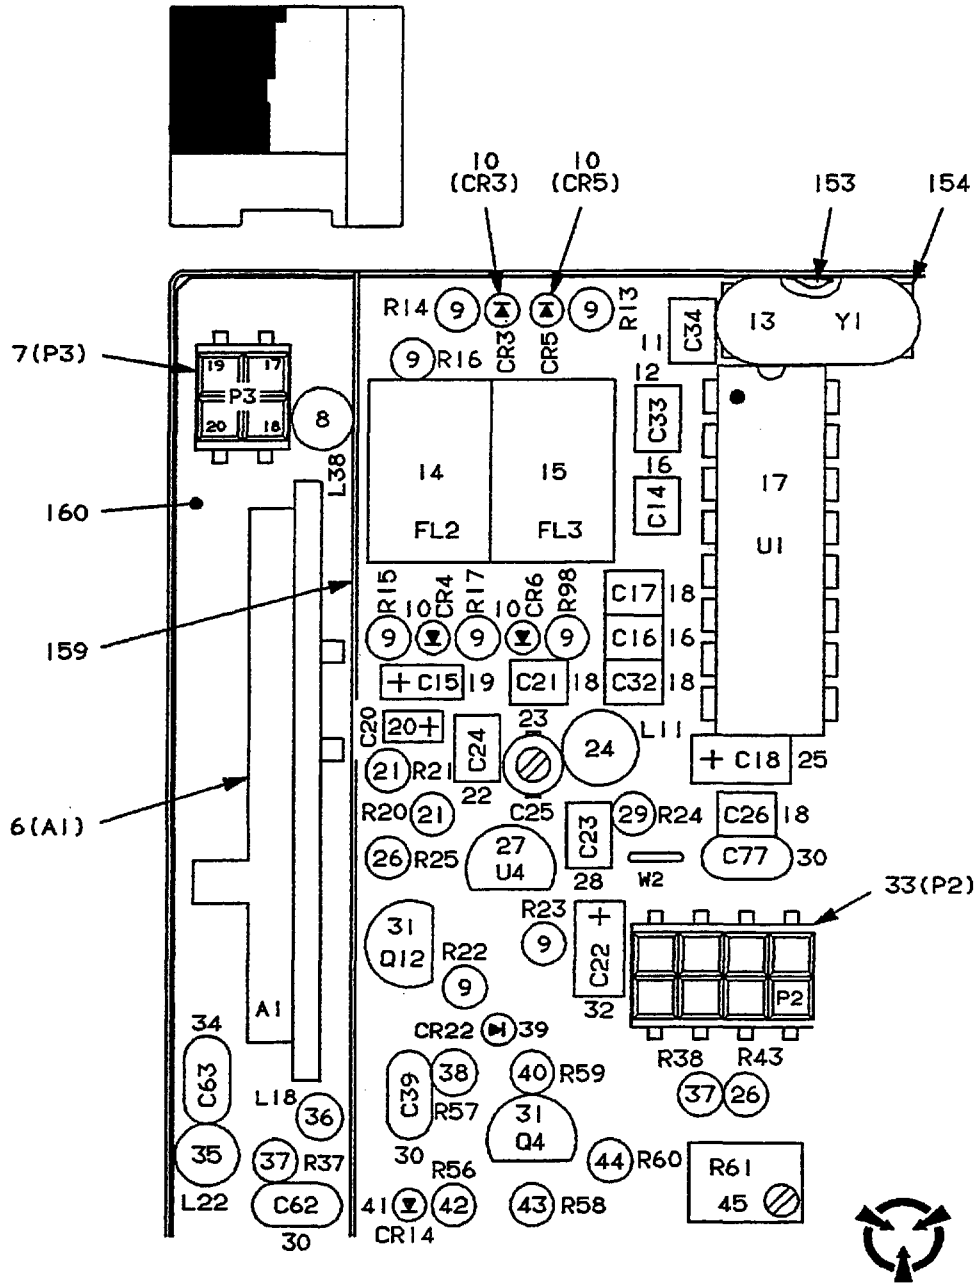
High Band RF/IF Module Assembly (Sheet 1 of 6)
